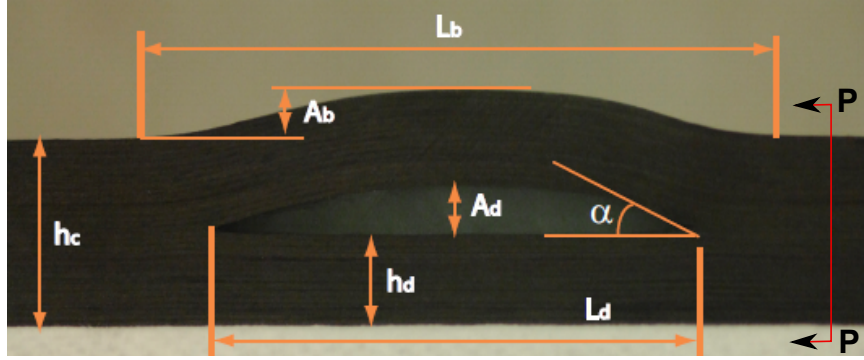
Dimensions of compression test coupons with defect inserts.
